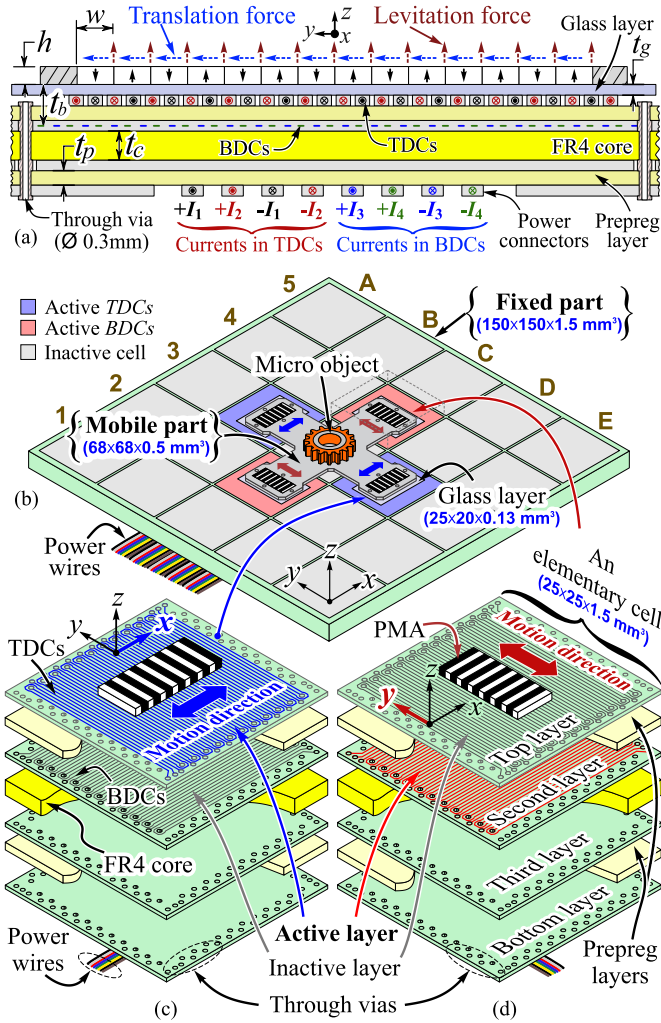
(a) Cross-sectional view of a single linear motor. (b) Three-dimensional model view of the planar electromagnetic conveyor architecture composed of 5×5 elementary cells. Exploded view of the four layers of an elementary cell (c) with active TDCs to drive the PMA along x -axis (i.e., cell D3) and (d) with active BDCs to drive the PMA along y -axis (i.e., cell C4).
